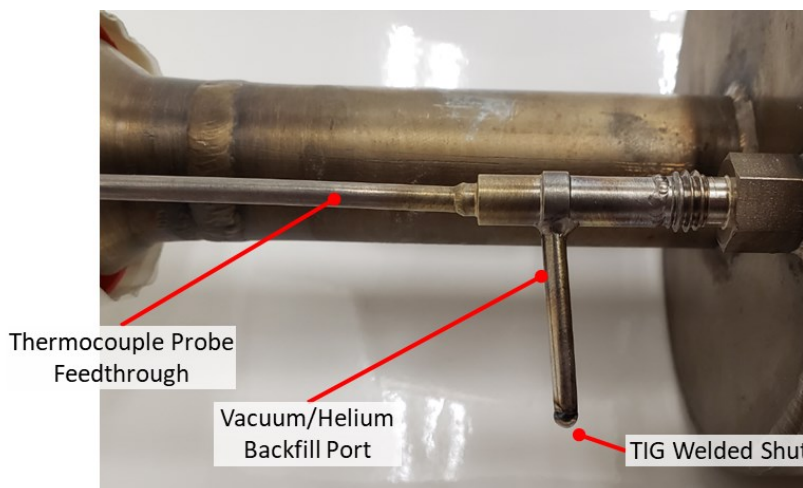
Vacuum/helium backfill port TIG welded shut
